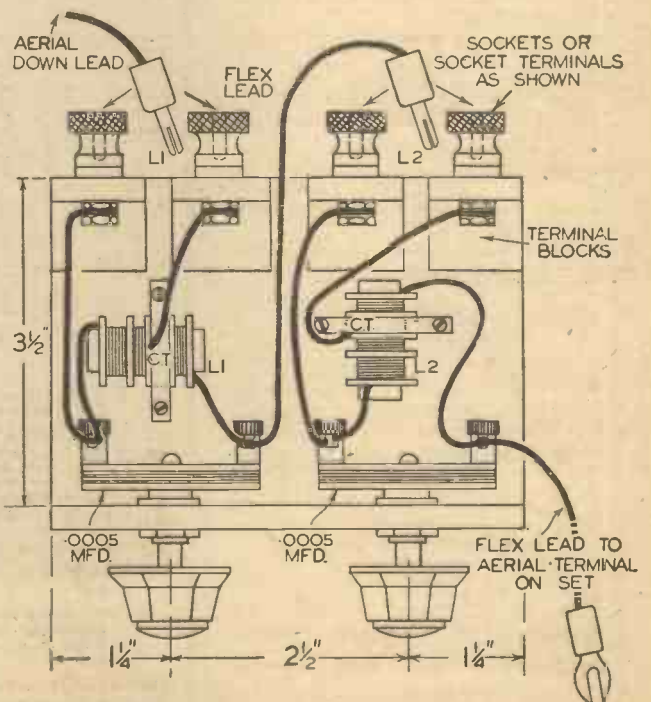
Wiring diagram. If required, engraved scales and pointers may be used in place of the knobs shown.
